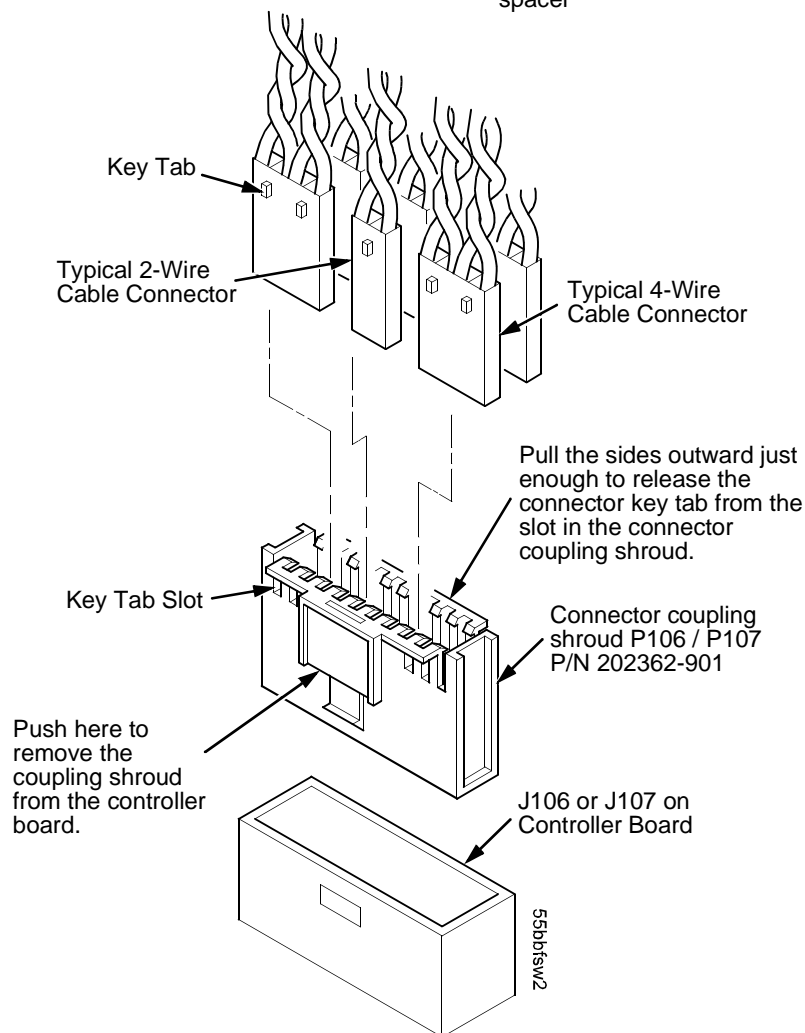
Cable Connector Coupling Shroud, Disassembly/Assembly
